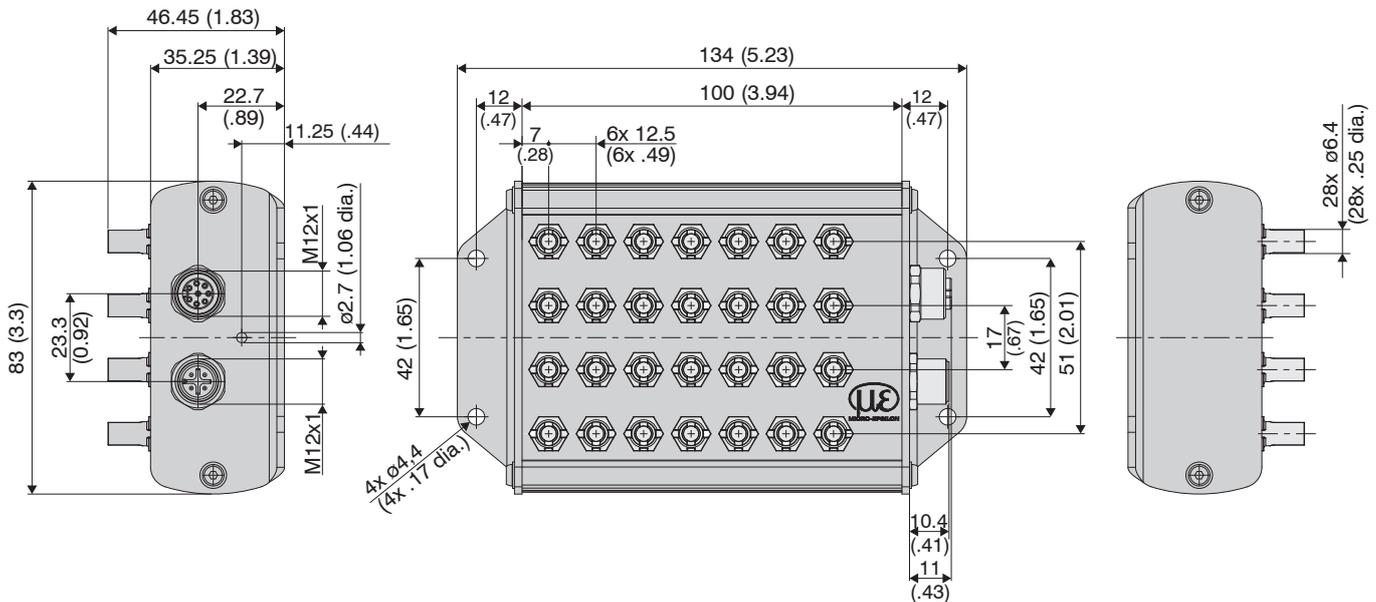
colorSENSOR MFA-28 dimensional drawing, dimensions in mm
